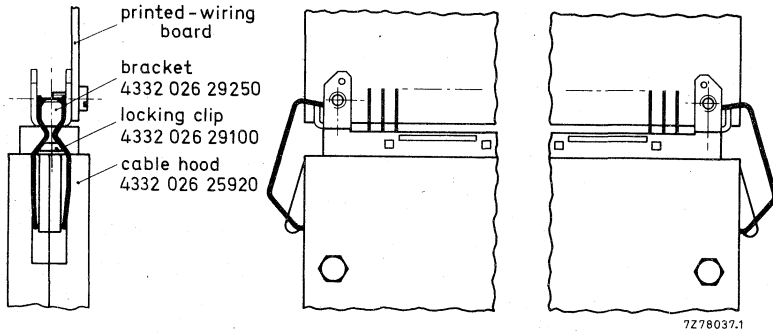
Mounting of a female part to a board with bracket having locking facility.
